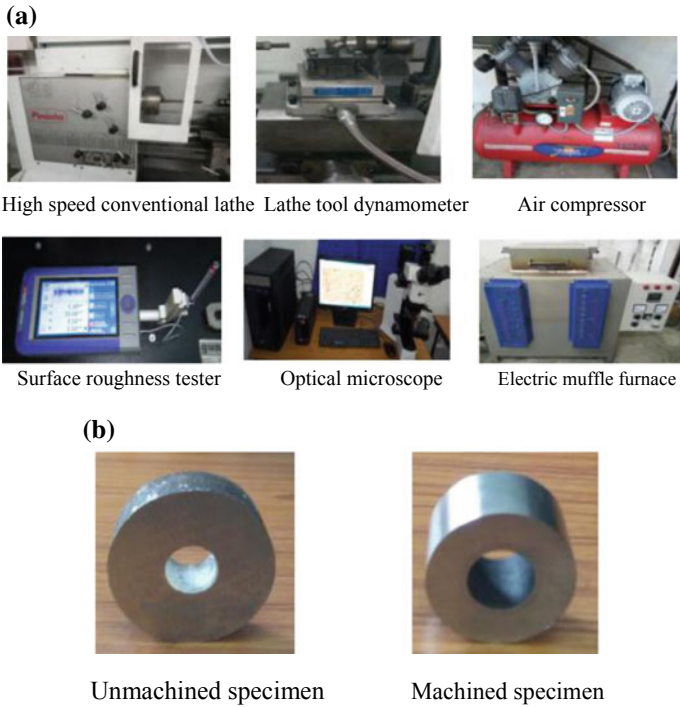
a Experimental set up. b Unmachined and machined specimen
